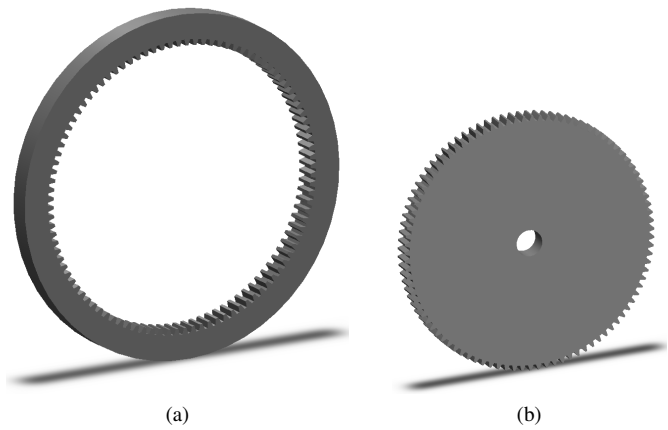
a) Outer cog wheel b) Inner cog wheel
